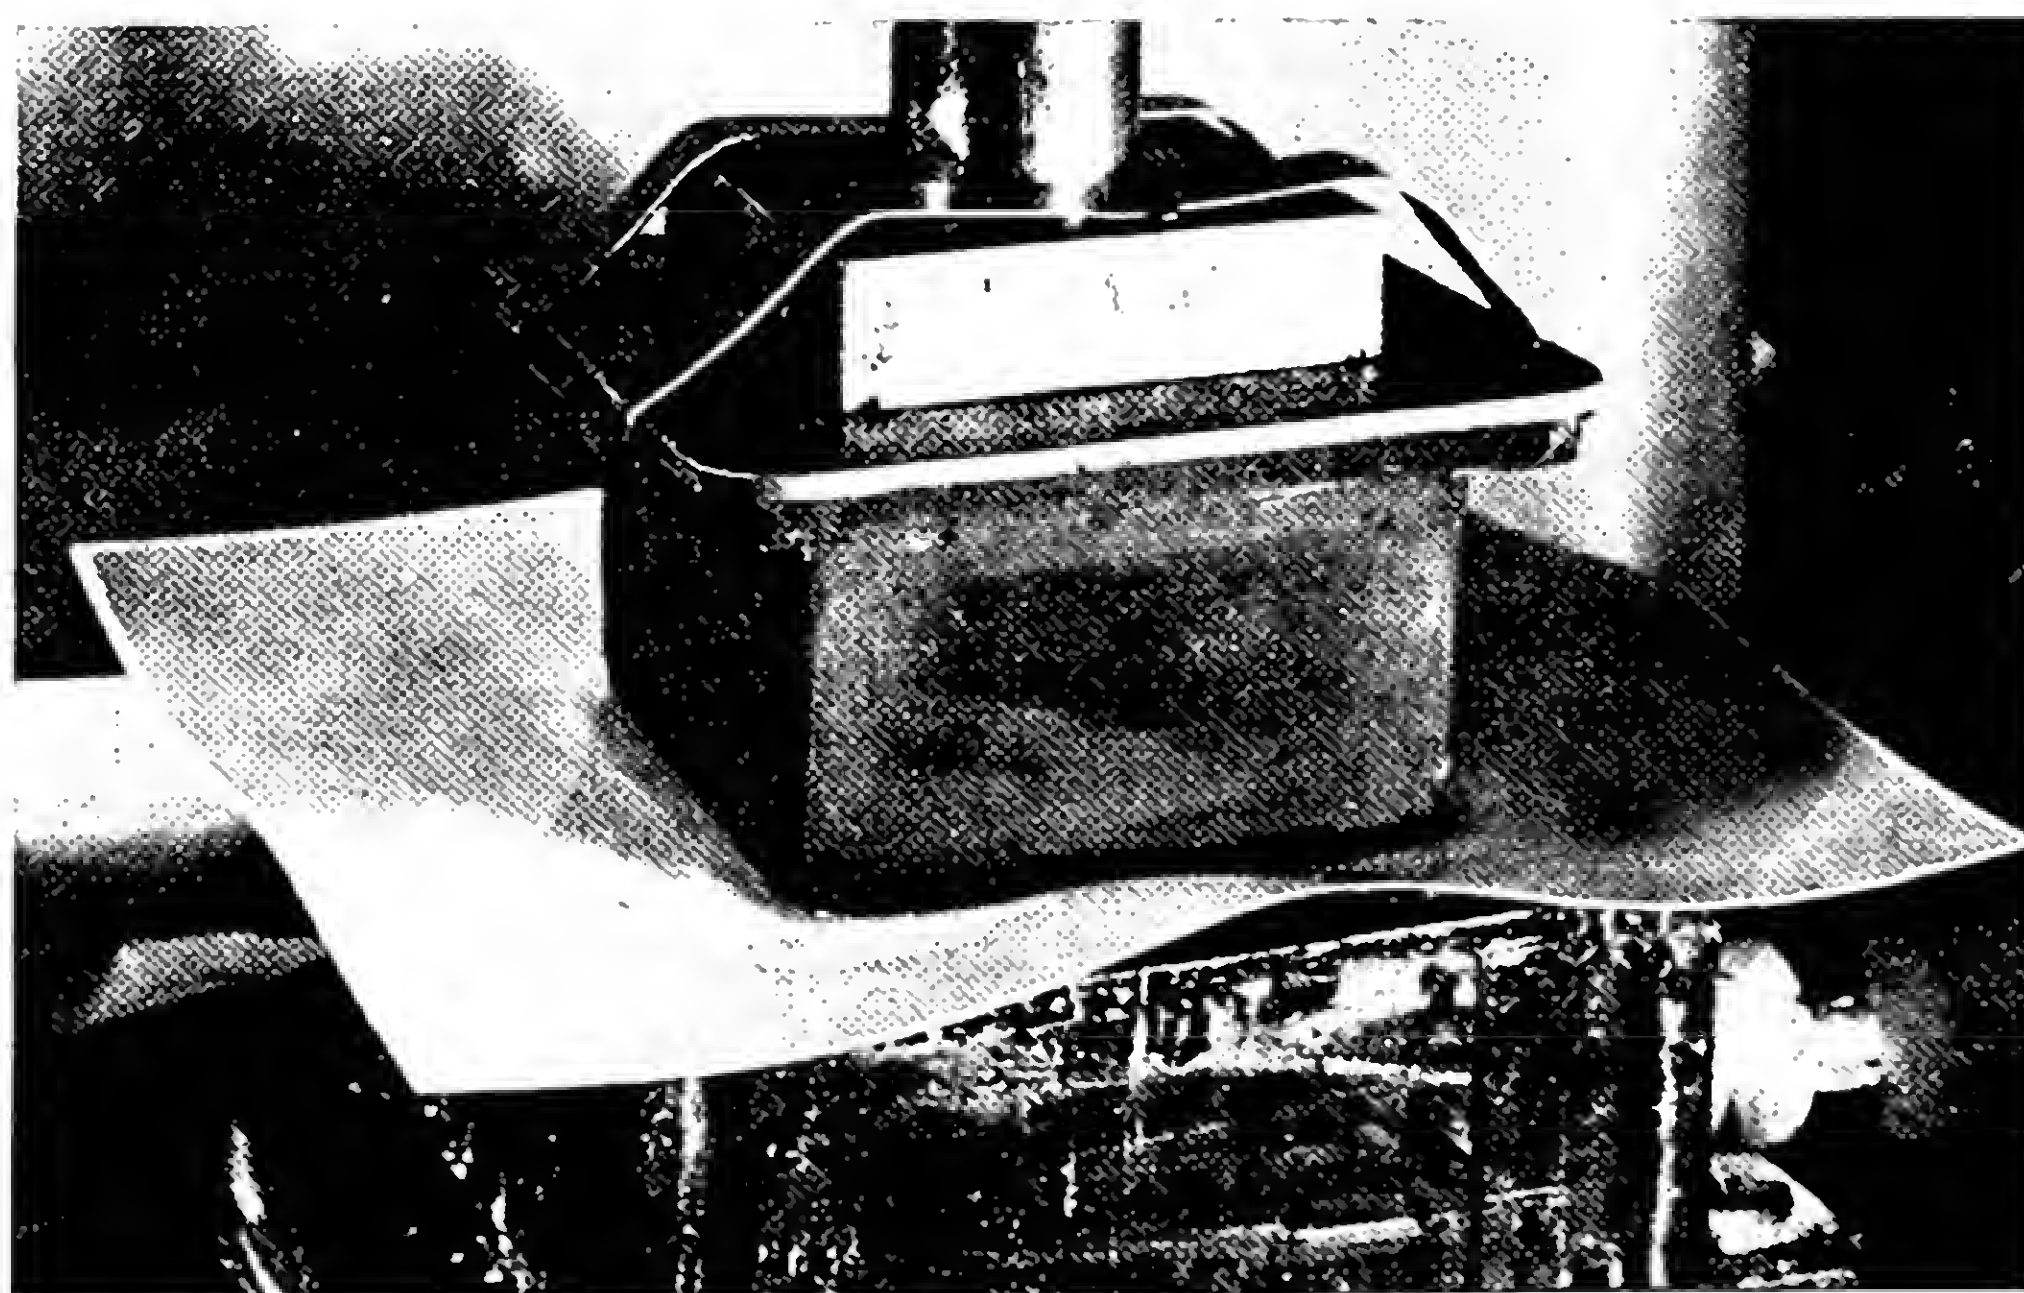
Pliable sheet in the rubber plunger press prior to forming.
